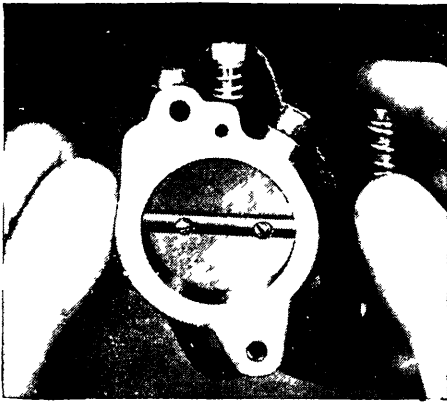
Assemble throttle stem and valve according to markings previously made. Hold valve closed and hold throttle body tight to check amount of clearance between valve and body. If clearance is excessive at any particular section, shift the valve until it fits the barrel with the least amount of light showing. Fasten screws securely
